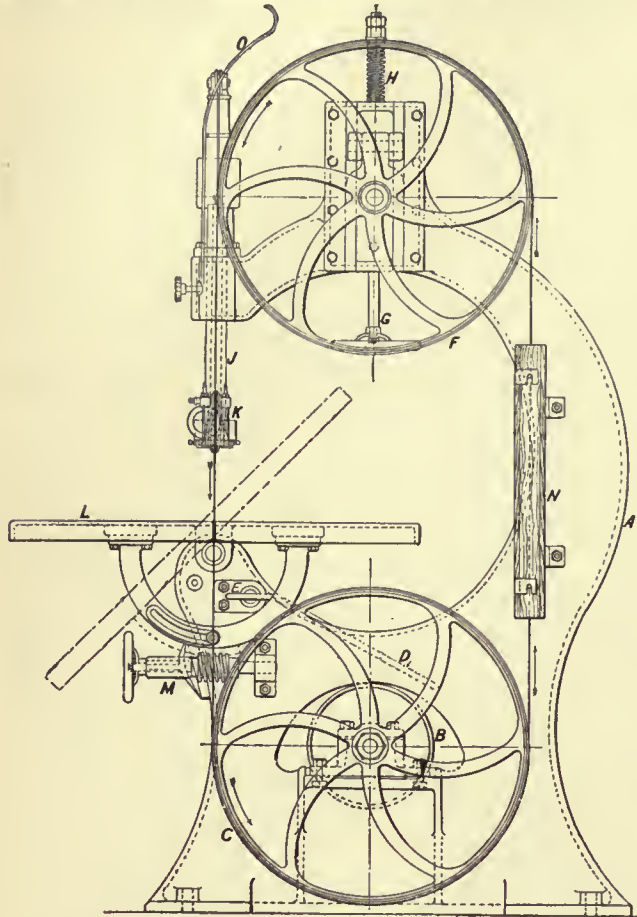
Band-sawing Machine with 30 in. pulleys.
